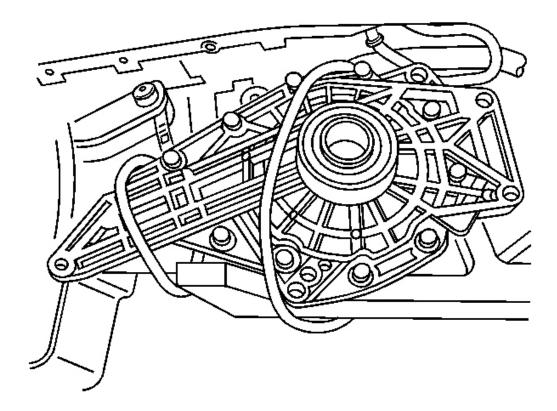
Securing Front Differential To Frame Courtesy of GENERAL MOTORS CORP.
